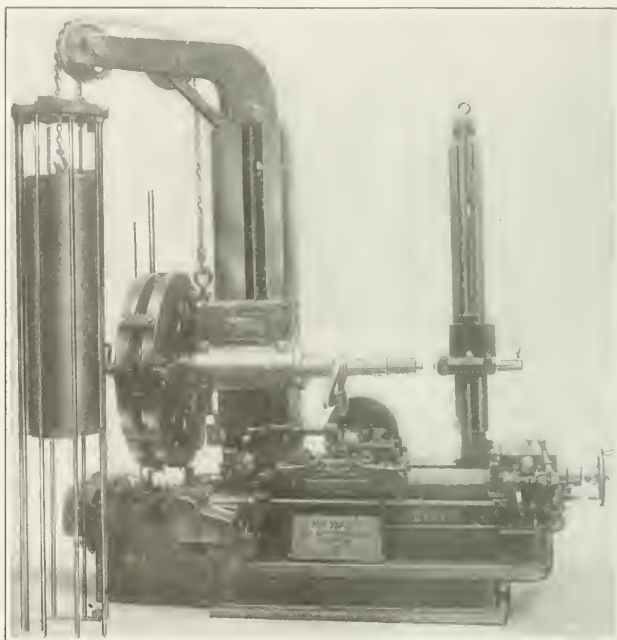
Newark No. 5 Gear-cutting Machine adapted for hobbing Worm-wheel Segments
